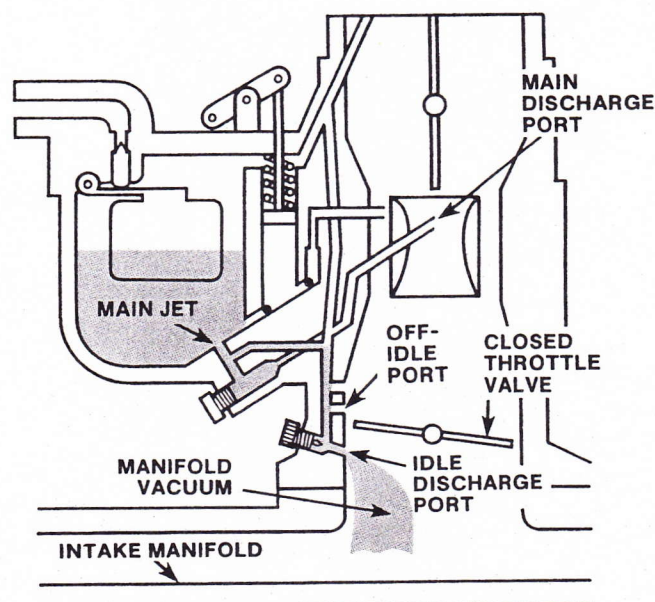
An idle discharge port draws fuel from the carburetor to allow the engine to run at idle.
